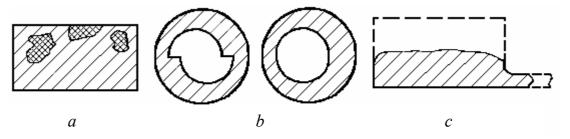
Some casting defects: a – sandy bowls; b – misalignment; c – incomplete filling
